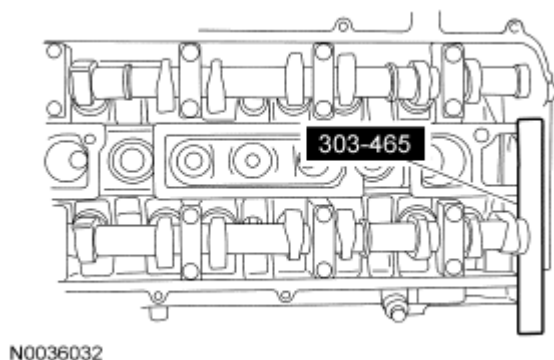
Identifying Special Tool (303-465) In Slots On Rear Of Camshafts
